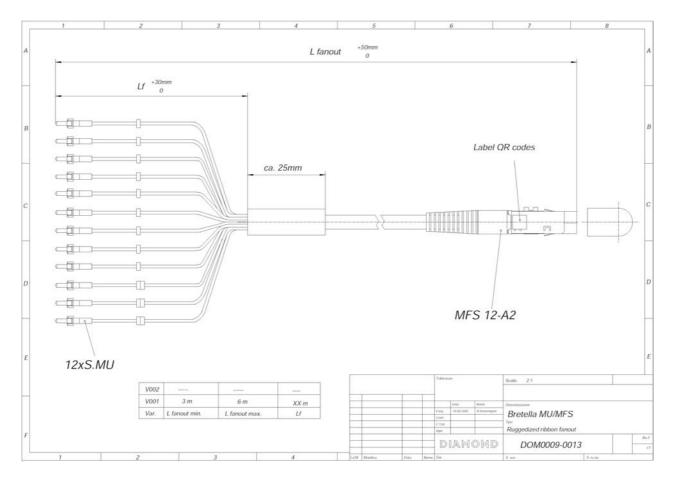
Engineering drawing of a ruggedized ribbon fanout.
